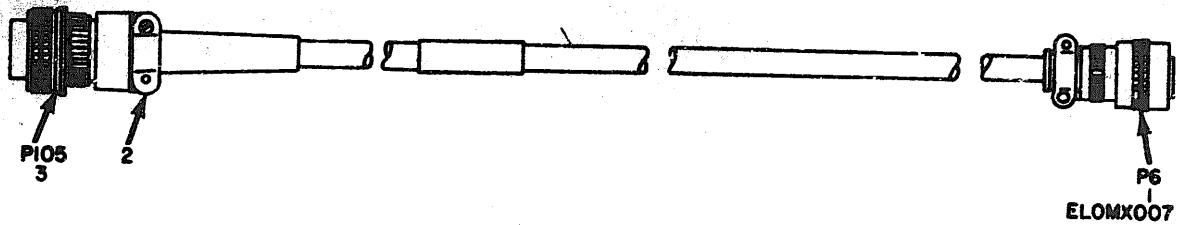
Cable Assembly, Special Purpose, Electrical CX-7569/ASM-63 998946-01-1 (W4).
